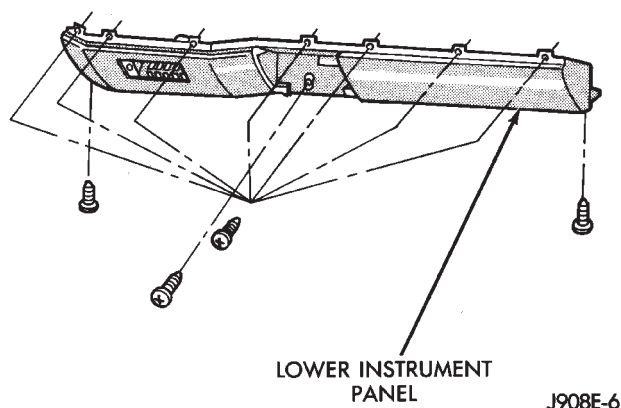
Lower Instrument Panel Remove/Install - XJ
